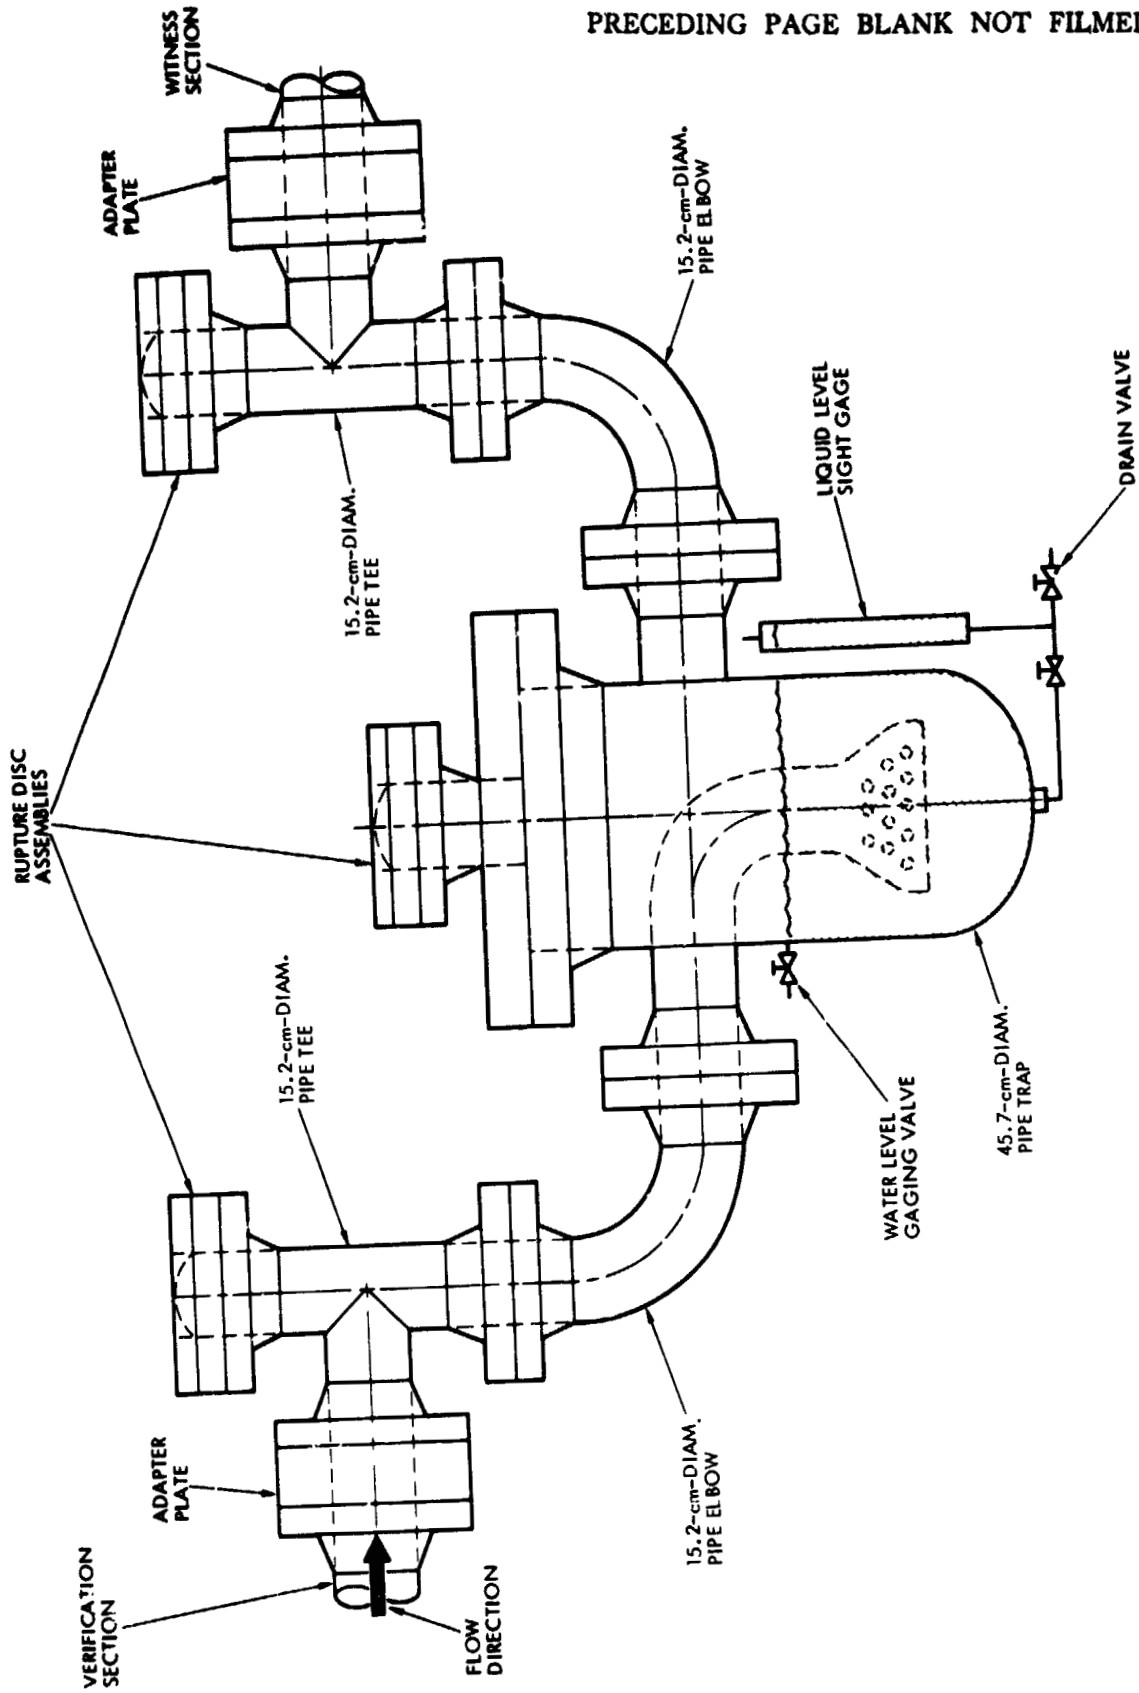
water-Trap Arrester Test Assembly Schematic Drawing
